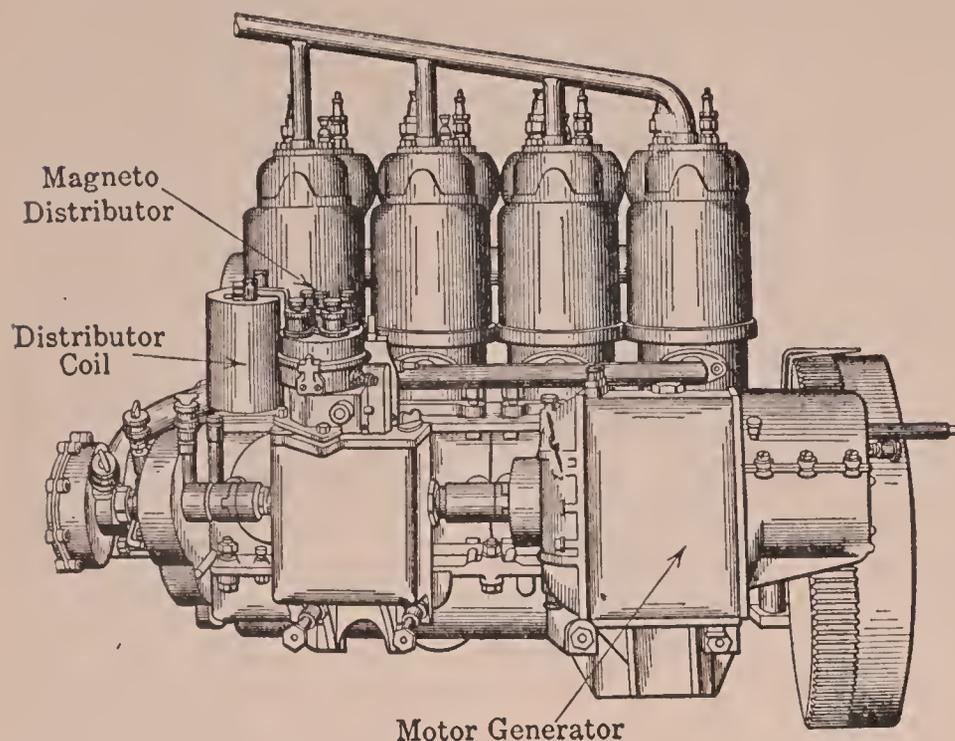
Side View of an Engine Fitted With the System Outlined in Fig. 140, and Showing Its Simplicity. The Single Unit Is Seen at the Right, Marked Motor Generator, the Coil and Distributor at the Left Being Parts of the Ignition System.
